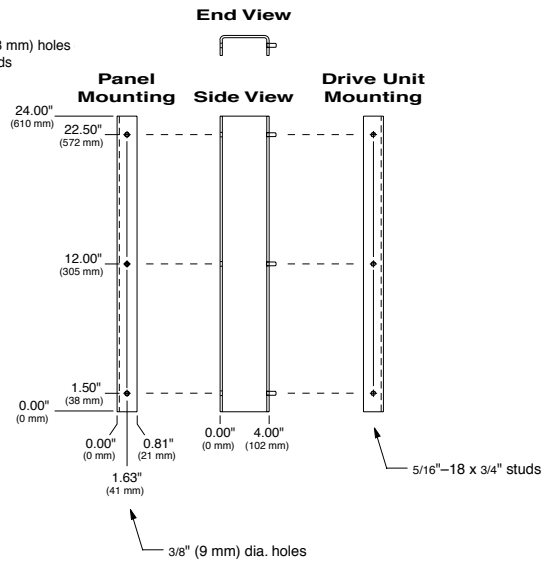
Form 34, 34X, 48, and 48X Mounting Dimensions (1100, 1105, 1200, and 1230 Drives)
